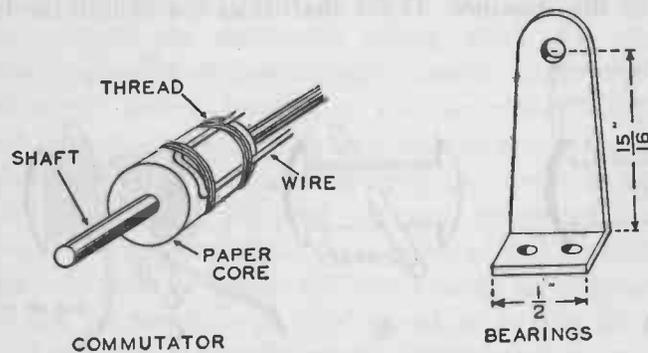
The commutator is formed by bending the ends of the armature wires and binding them in position on the paper core. The bearings are made according to the shape and dimensions shown above.
